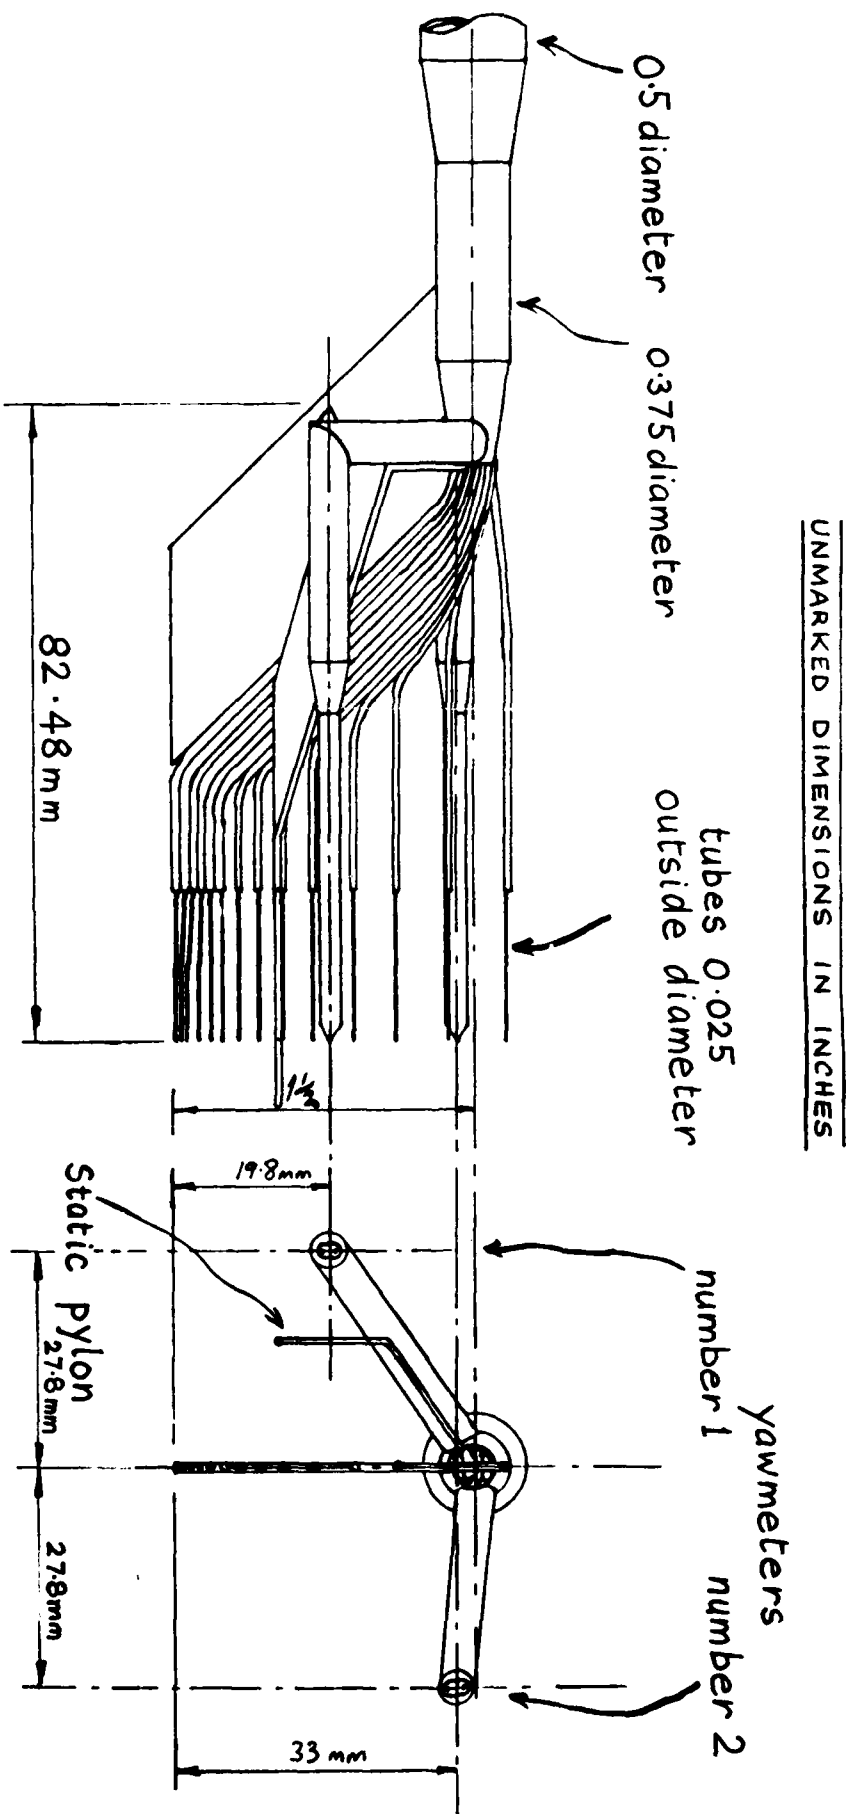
FORWARD PART OF COMBINED BOUNDARY LAYER RAKE AND YAWMETER ASSEMBLY
